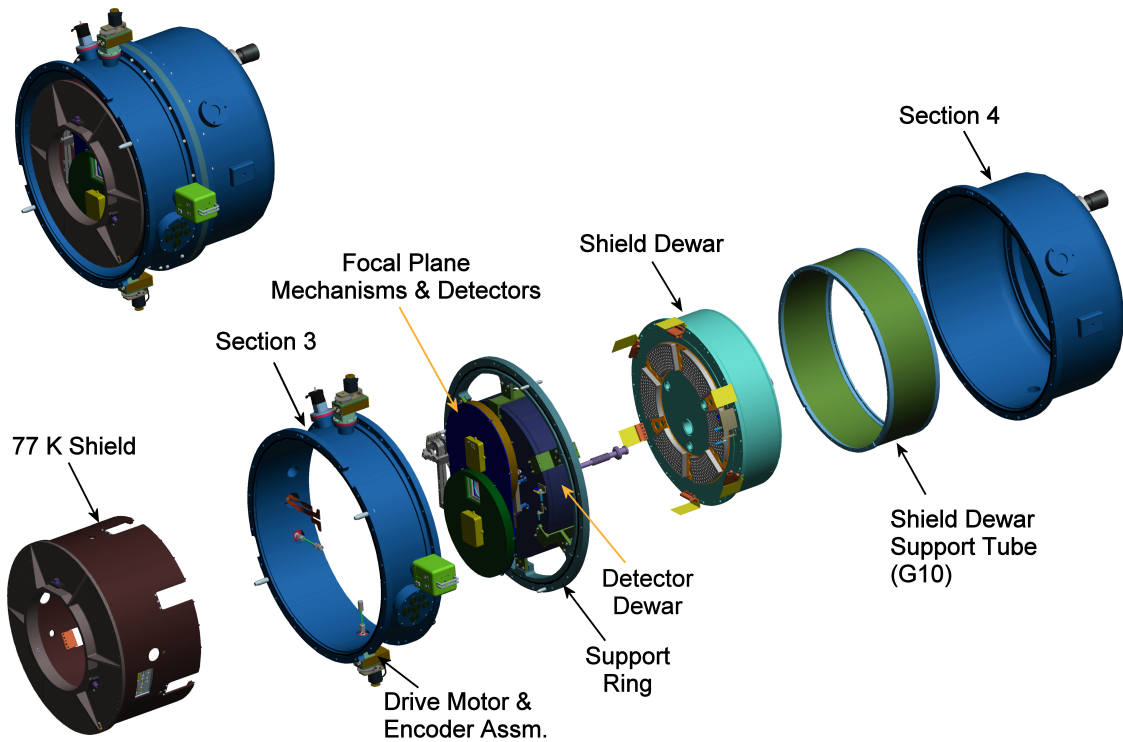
Exploded view of the back end assembly. Sections 3 and 4 of the vessel are shown in blue. The drive motor feedthroughs and wiring connect to the focal plane mechanisms and detectors through the walls of section 3 (see Figure 12). A stainless steel support ring holds the detector dewar via six G10 clamps (see also Figure 12). The shield dewar is supported by a G10 cylinder attached to the inside of section 4. The 77 K radiation shield, to the far left, attaches to the shield dewar.
